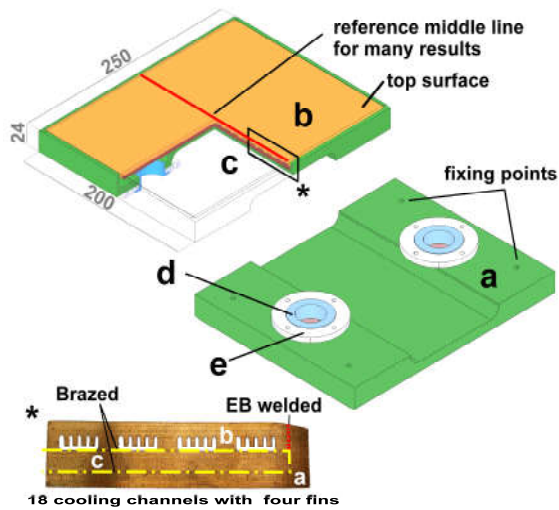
CAD model of the CP with indication of its parts and joining techniques
